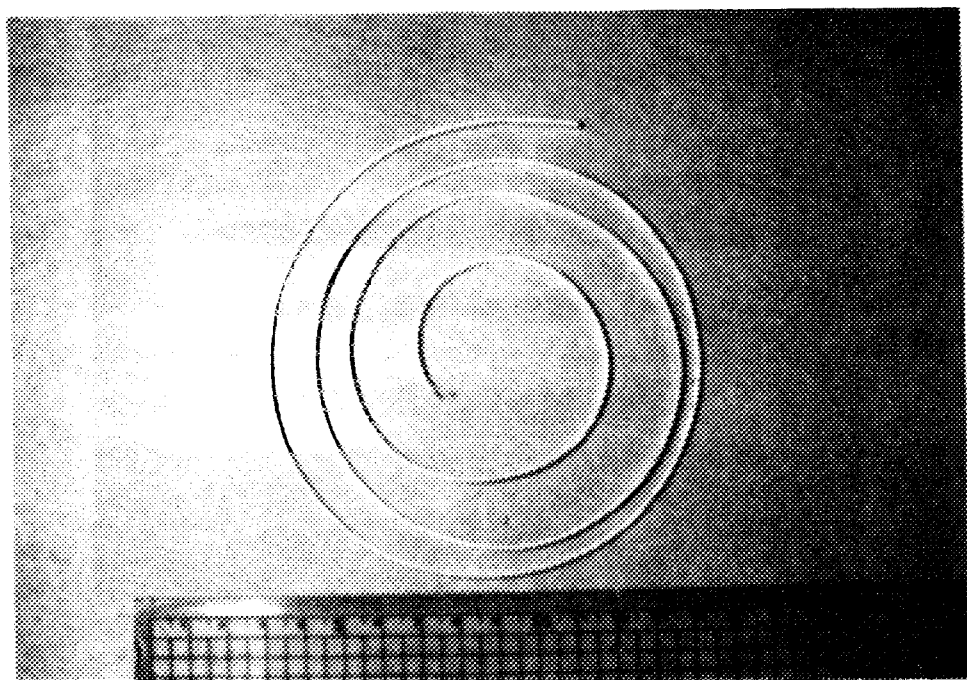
Shape of the assembled tape after thermal bonding of the tape of 3 pieces.
